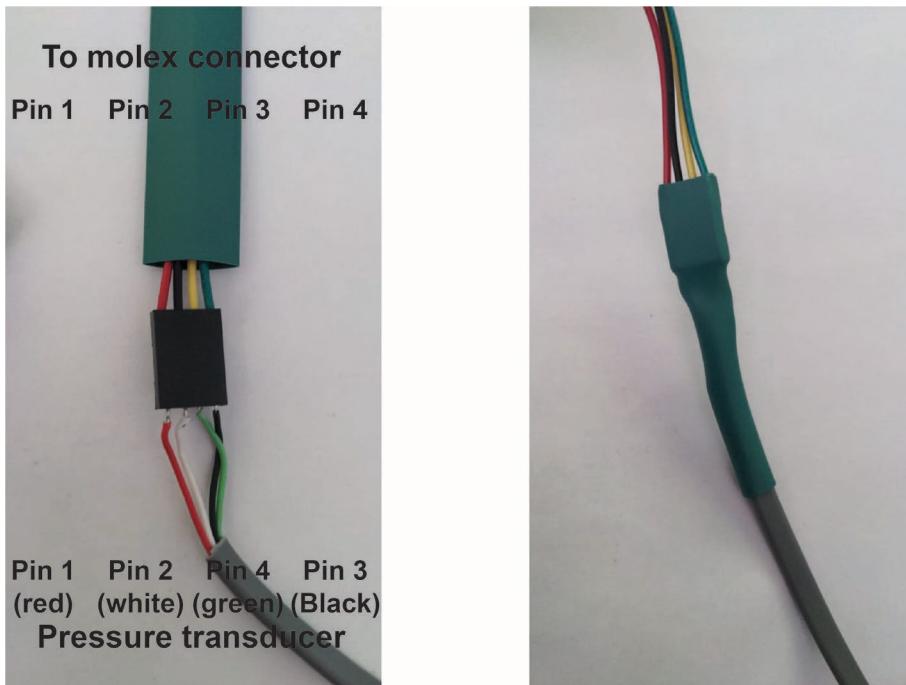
Pressure sensor connections before (Step 3) and after (step 4) being secured with heat shrink tubing.
